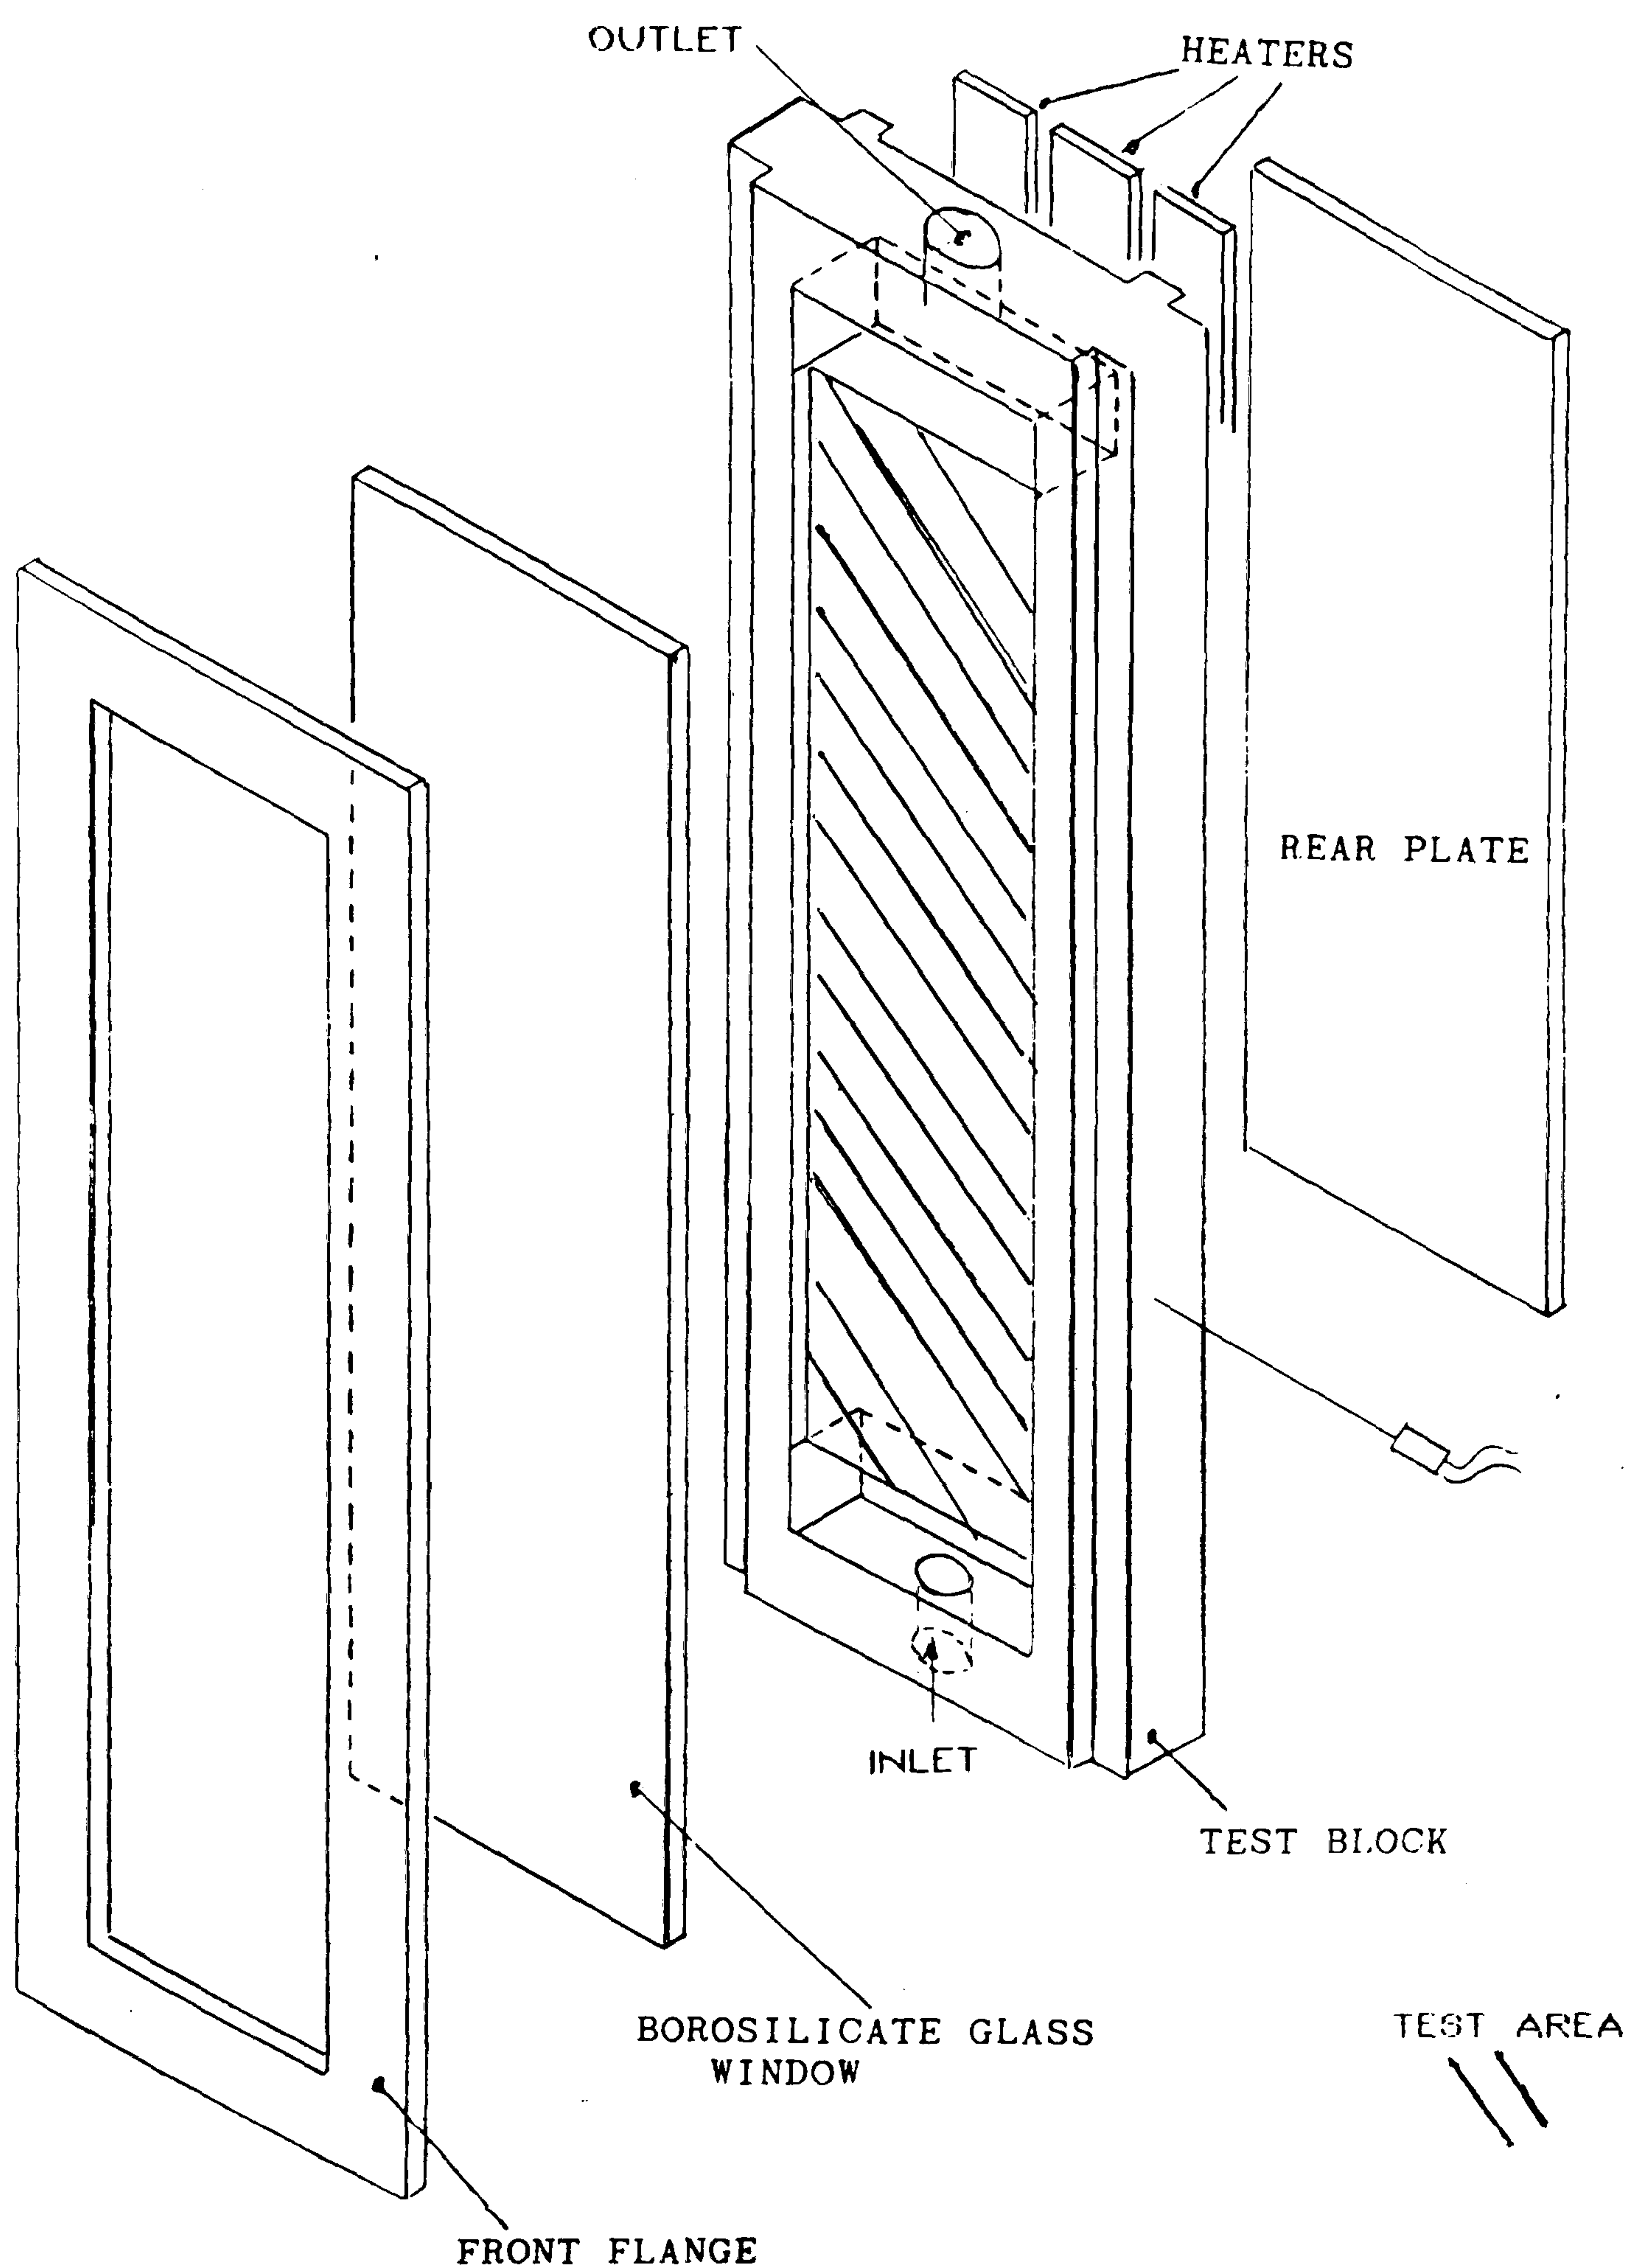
Exploded View of Flow Visualisation Test Section-Mark II Rig
